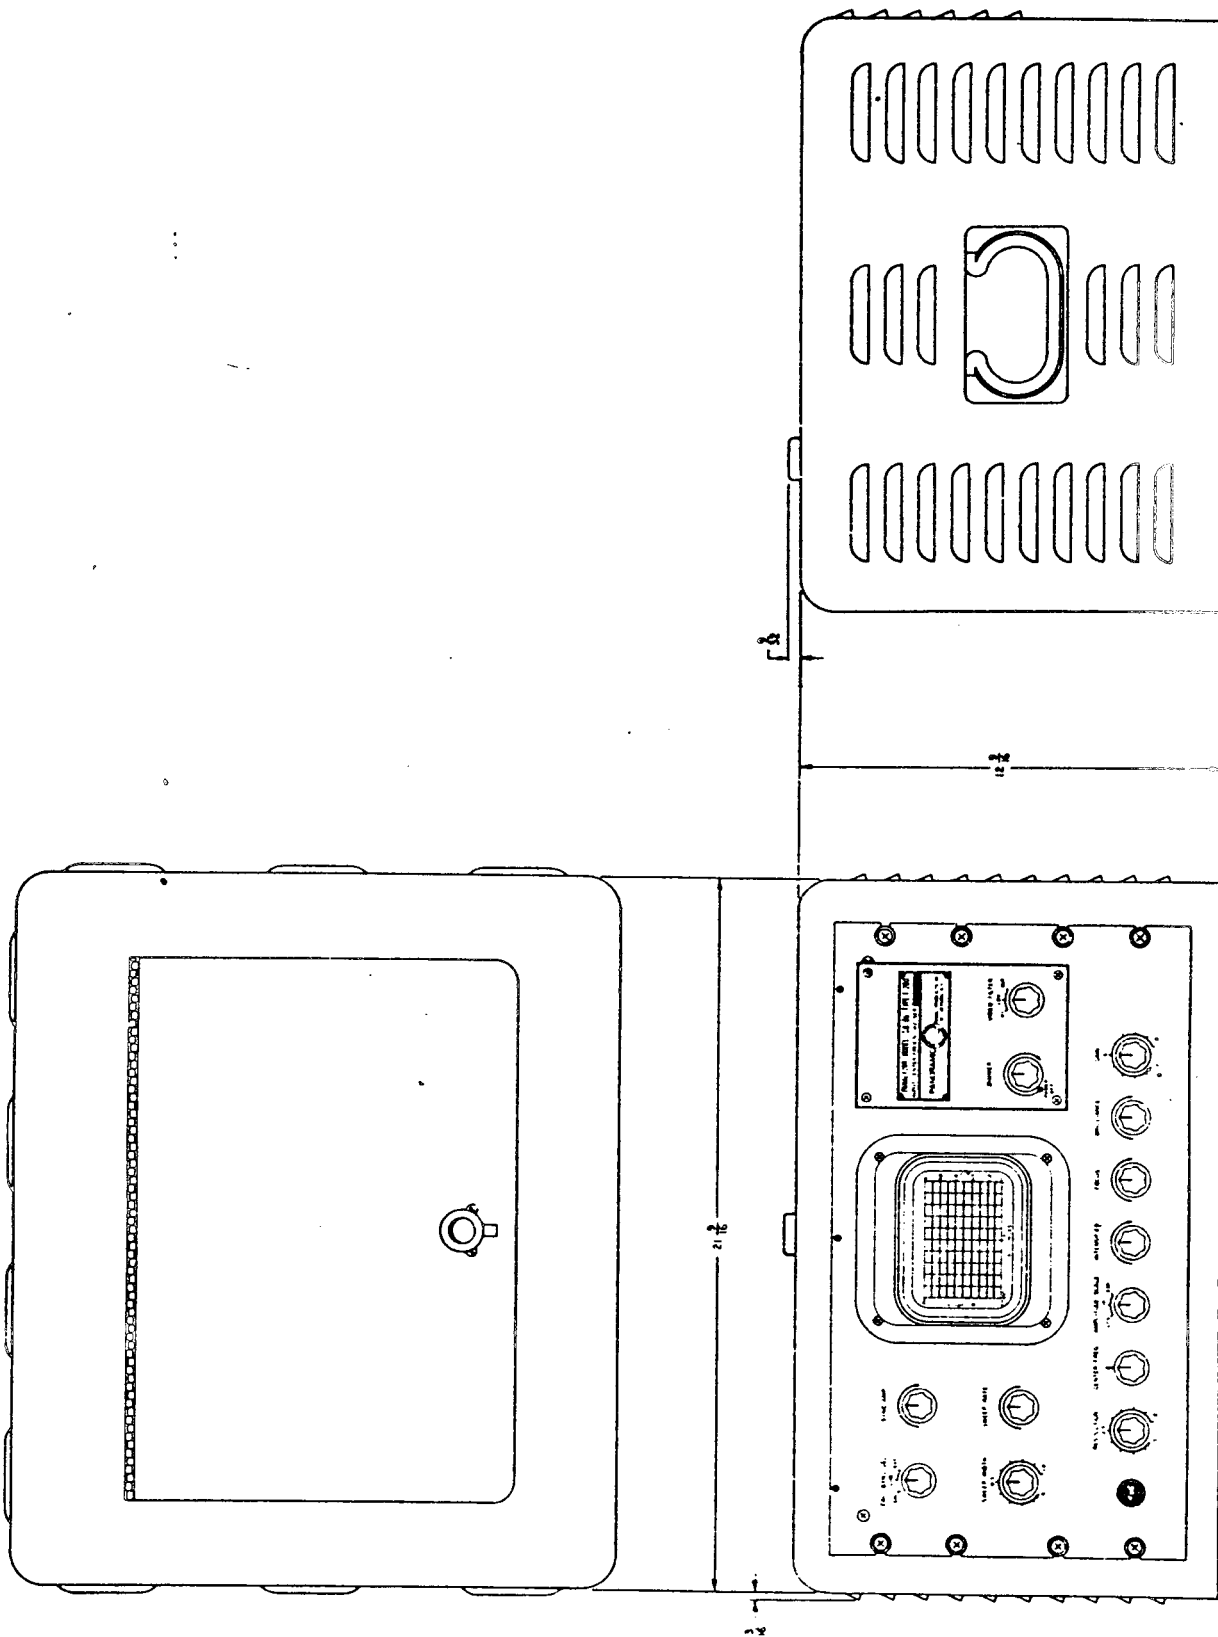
Outline Dimensional Drawing, Model SA-8bY, in Cabinet.
